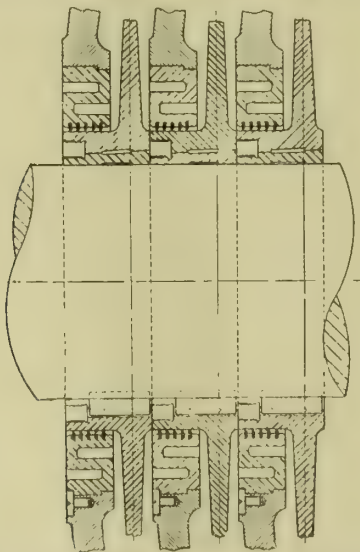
SECTION SHOWING METHOD OF ATTACHING WHEELS TO SHAFT BY TAPERED SLEEVE DRAWN INTO PLACE BY A NUT AND HELD FROM ROTATING ON SHAFT BY A KEY. ALSO THE LABYRINTH PACKING BETWEEN DIAPHRAGMS AND HUBS OF WHEELS.
